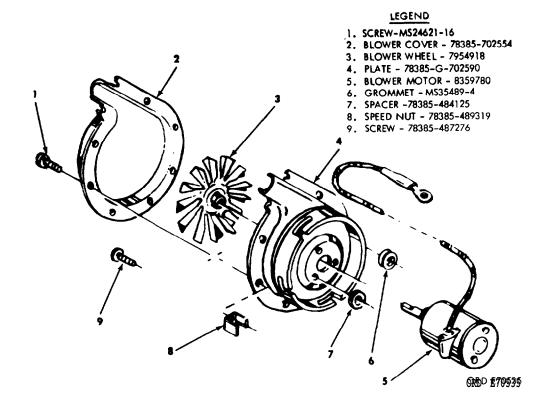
Disassembly/assembly of winterization hit coolant heater combustion air blower.
